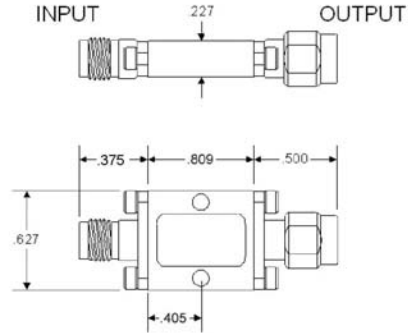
Coaxial package mechanical dimensions. Input and output are labeled on the coaxial package.
